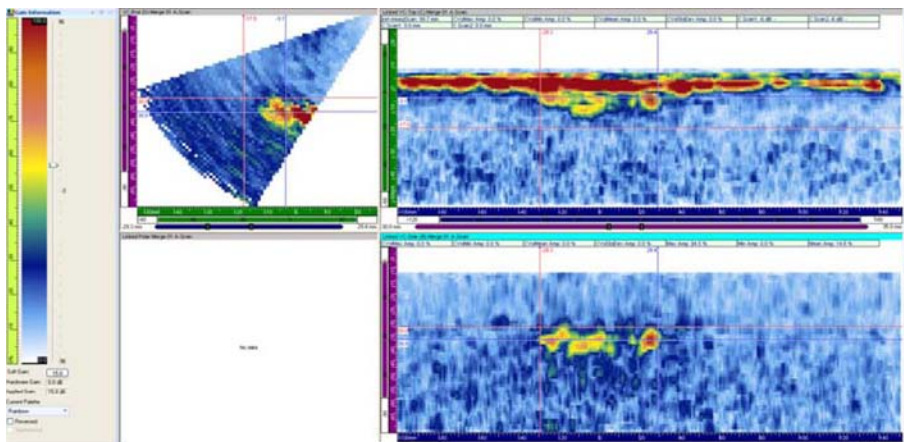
Specimen 9C-034 Flaw 2 After Weld Crown Removal at 1.5 MHz, Line Scan Data
